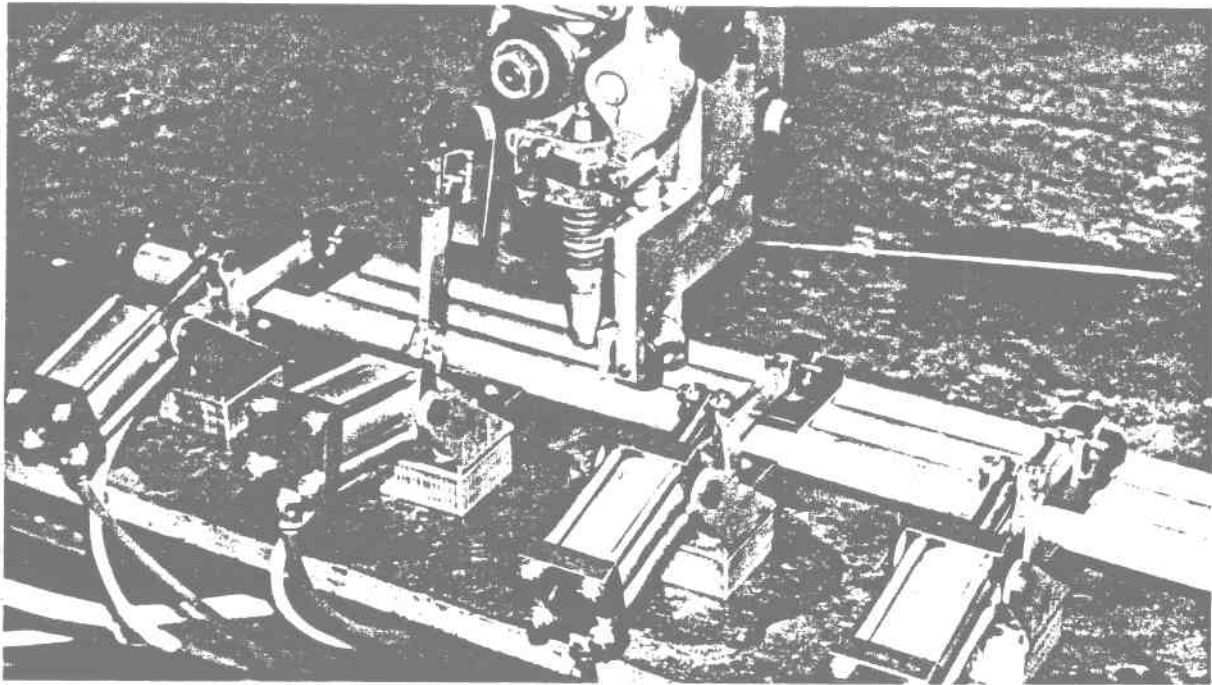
Pneumatically Actuated Toggle Clamps and Roller Guide
